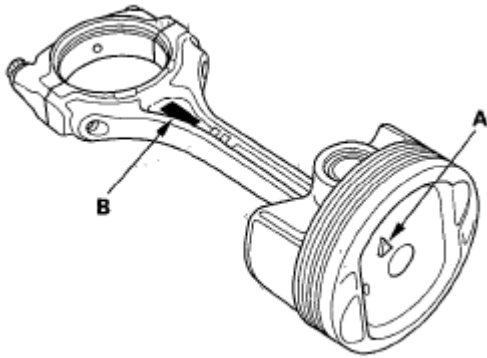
Identifying Piston Arrow Pointing Up & Connecting Rod With Embossed Marks On Same Side
